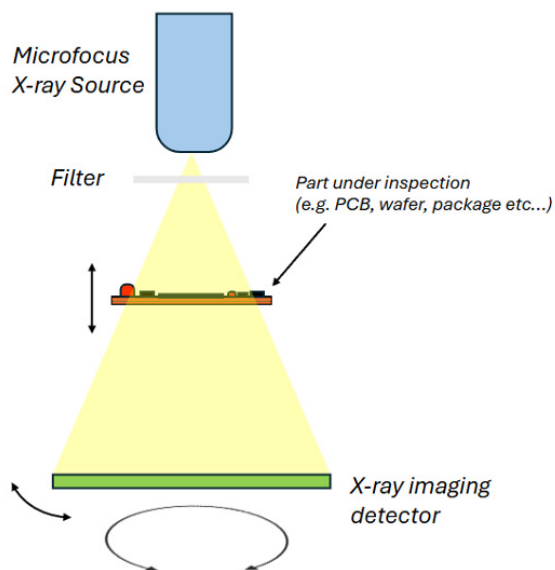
Schematic of a typical electronics X-ray inspection system. A microfocus source shines X-rays on to a part under inspection (e.g. printed circuit board, silicon wafer, packaged device etc...). A detector records an image of the attenuated X-ray beam, revealing the internal structure of the object. By moving the object closer to the X-ray source, higher geometric magnification can be achieved and therefore a higher resolution image of the object can be formed. Adding a filter material into the beam is a good way of removing low energy 'soft' X-rays and reducing radiation dose. Inclined imaging (often referred to as 2.5D imaging) can be performed by tilting the part or x-ray detector. 3D imaging can be performed by rotating the detector around an axis on a plane, similar to computed tomography, to get a three-dimensional view of the internal structure of the part. This limited angle tomography is often called laminography.
